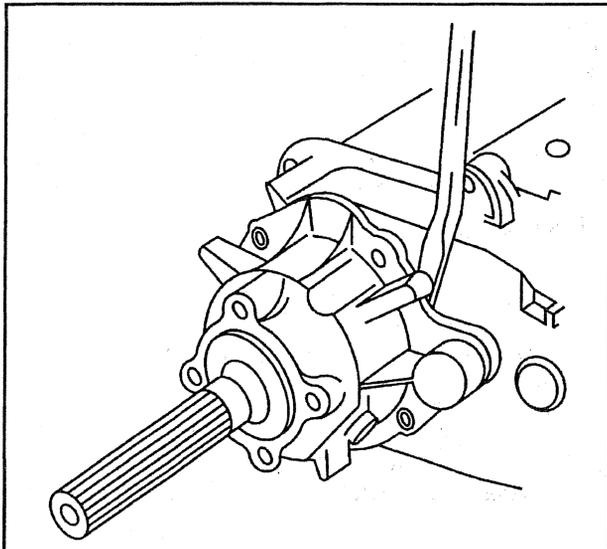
NP 241 Transfer Case Rear Retainer Housing
